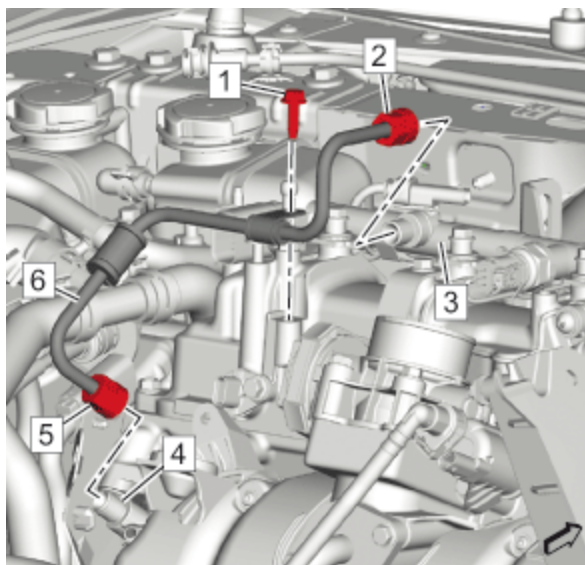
Fuel Feed Intermediate Pipe, Bolt And Nuts
